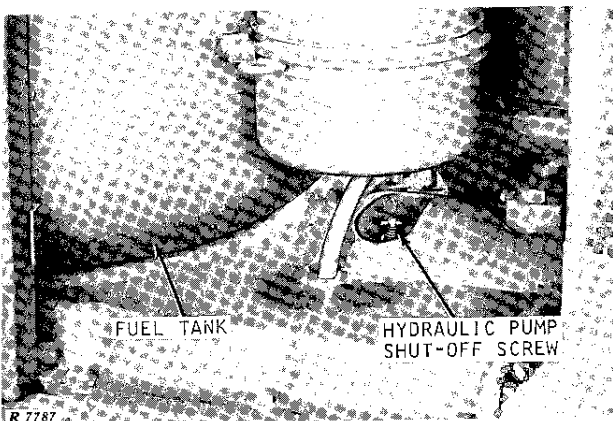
Hydraulic Pump Shut-Off Screw
